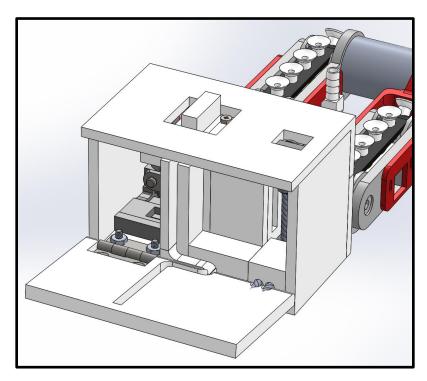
Isometric View of Sensor Deployment Mechanism With Open Front
